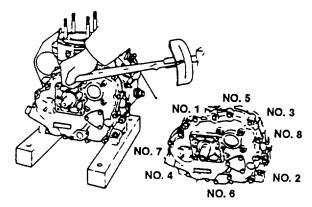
Tightening Sequence for Crankcase Cover Bolts
